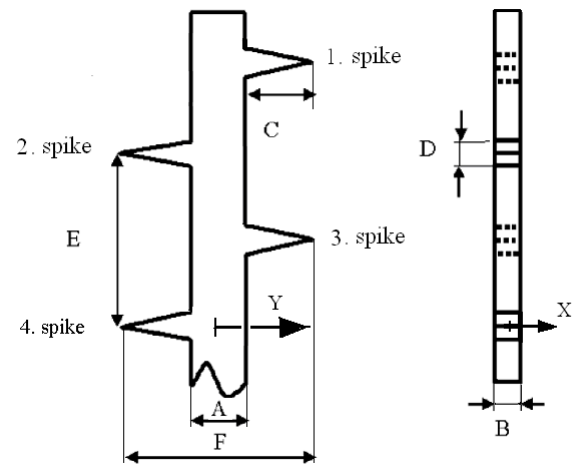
Sketch of spike-type discharge electrode: (a) side and (b) front view. (Dimensions are: A=10 mm, B=1.5mm, C=D= 9 mm, E=64 mm)
